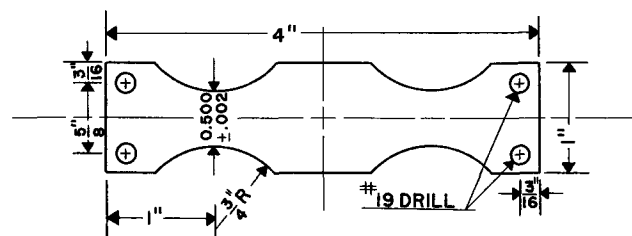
Dimensions of fatigue specimens. The thickness of the specimens ranged from 0.015 to 0.02 in. (375-500 μm).
